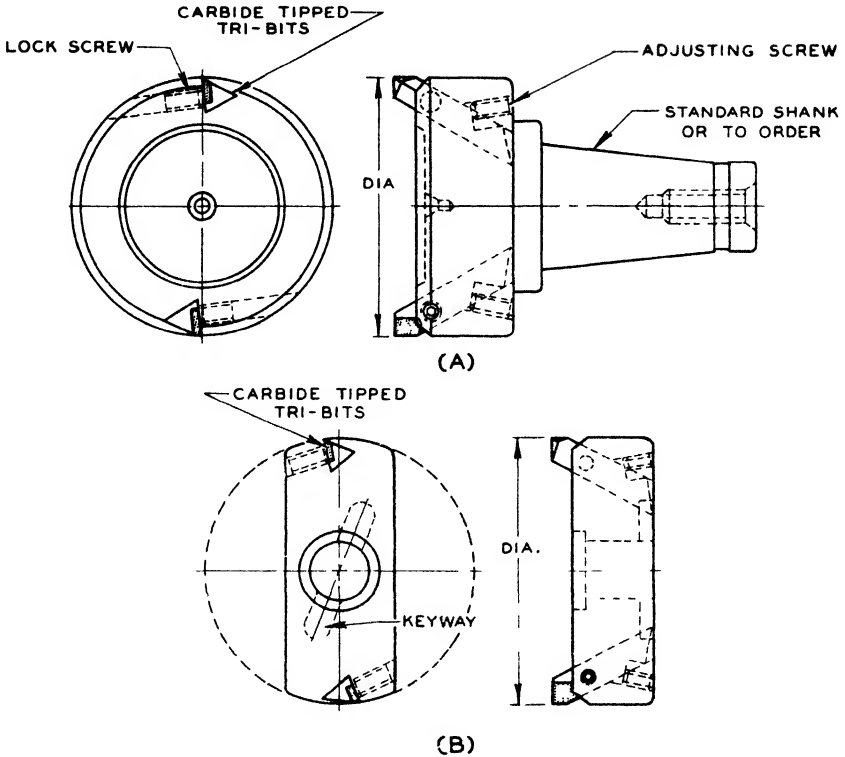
Two-Blade Weddell Fly Cutter Having a Solid Shank (A) and a Two-Blade Shell-Type Weddell Fly Cutter (B)
